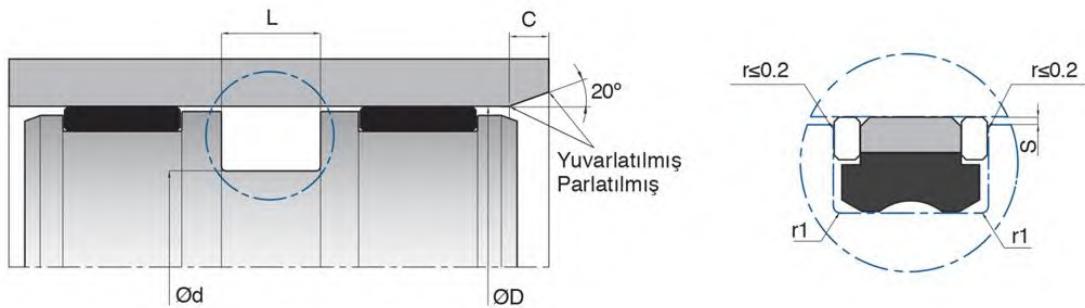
Design suggestion for K48 Heavy duty cylinder seal from Kastaş A.Ş. [22].
